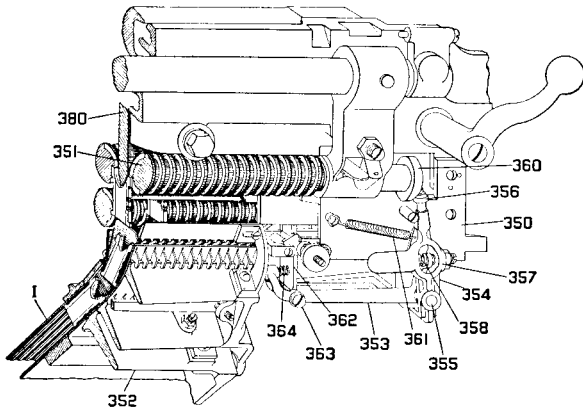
View showing the distributor box 350 in its relation to the distributor screws 351 and to the channel entrance 352 and the magazine.
